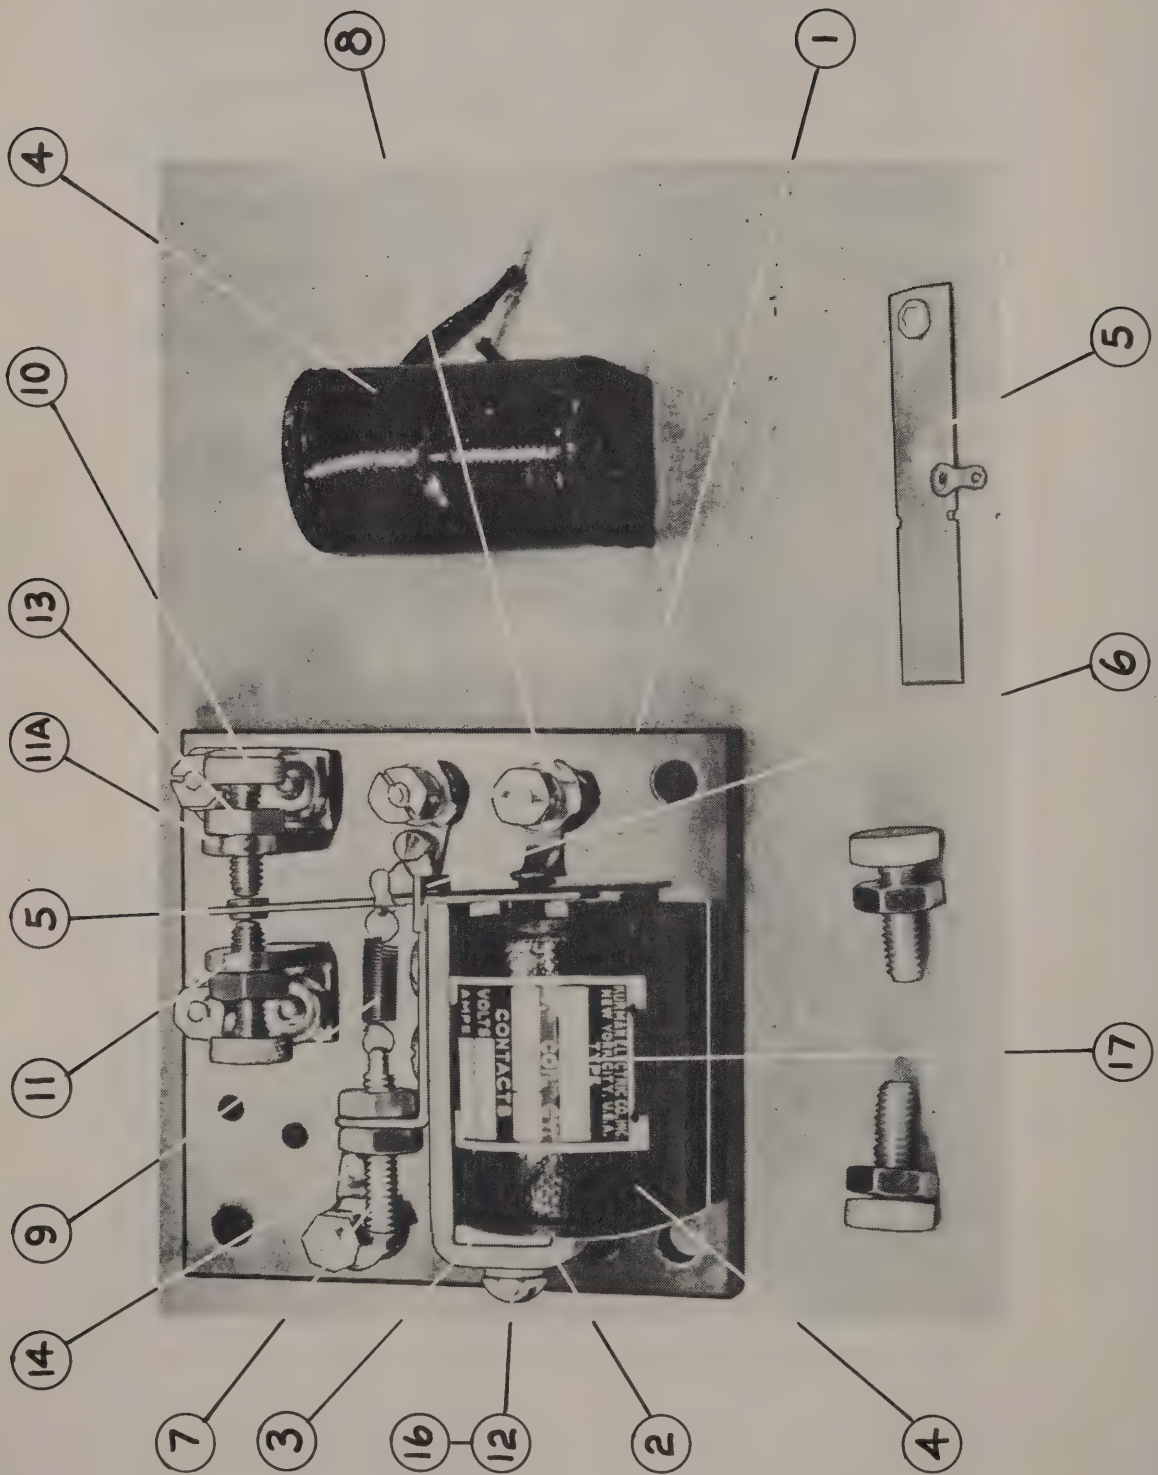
KURMAN ELECTRIC COMPANY RELAY ASSEMBLY (K-1)
